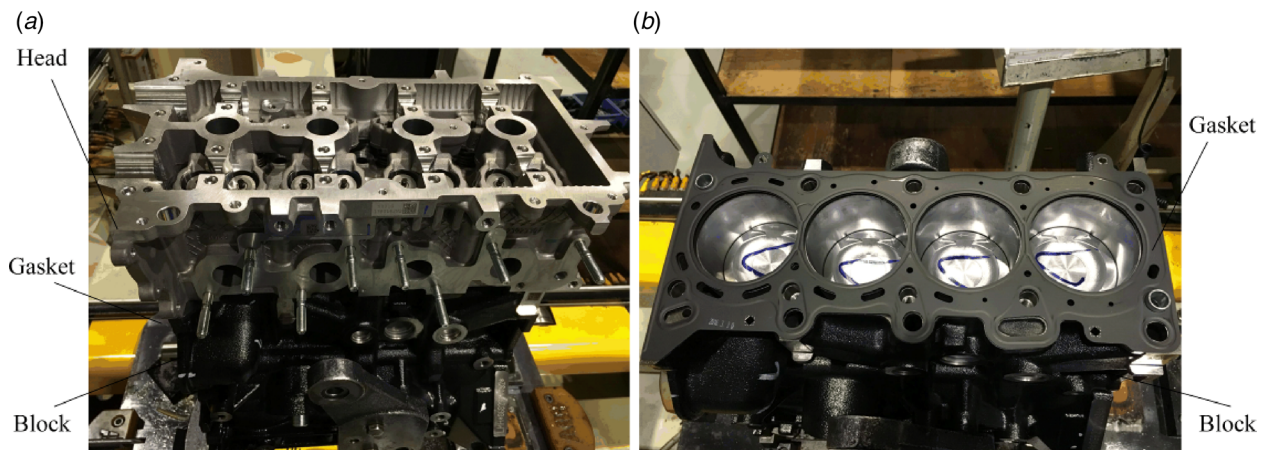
(a) Assembled engine cylinder head and block and (b) gasket and block
